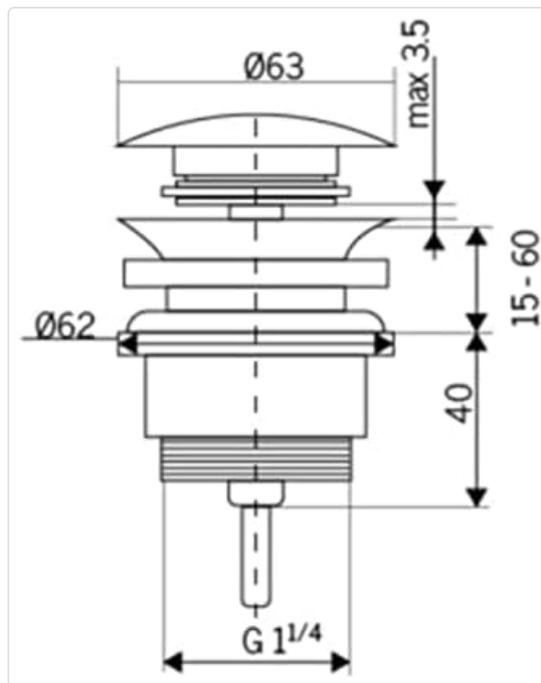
Technical dimensions of the IMEX VCC001 drain valve.
